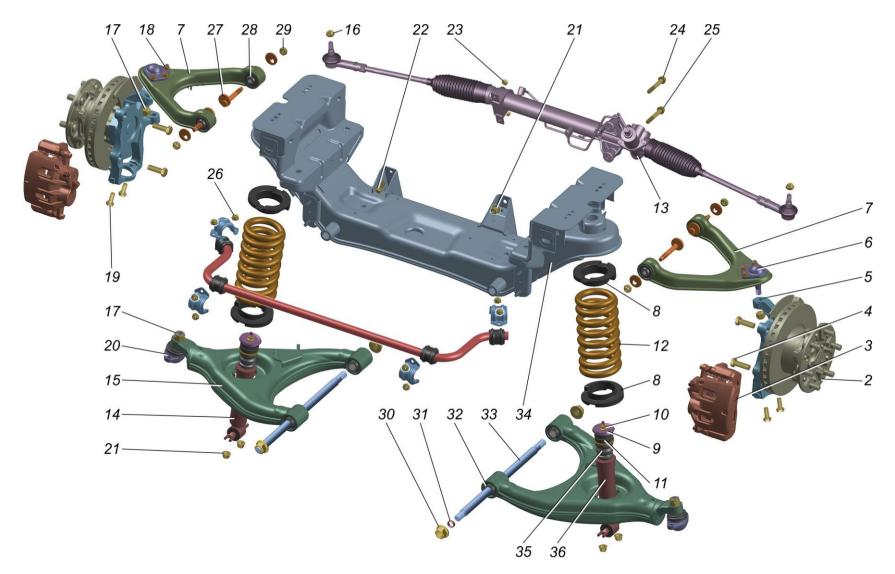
Front suspension parts: 1 – wheel cap mounting bracket; 2 – strut with hub and brake disk; 3 – brake caliper; 4 – bolt fastening the brake caliper to the strut; 5 – strut; 6 – upper ball joint; 7 – upper arm; 8 – spring gasket; 9 – washer; 10, 16, 17, 18, 21, 23, 26, 29, 30 – nuts; 11 – cushion; 12 – spring; 13 – steering gear; 14 – shock absorber; 15 – lower arm; 19, 22, 24, 25 – bolts; 20 – lower ball joint; 27 – adjustment bolt complete with eccentric washer; 28 – upper arm silent block; 31 – bushing; 32 – lower arm silent block; 33 – lower arm axle, 34 – subframe; 35 – buffer; 36 – boot.
